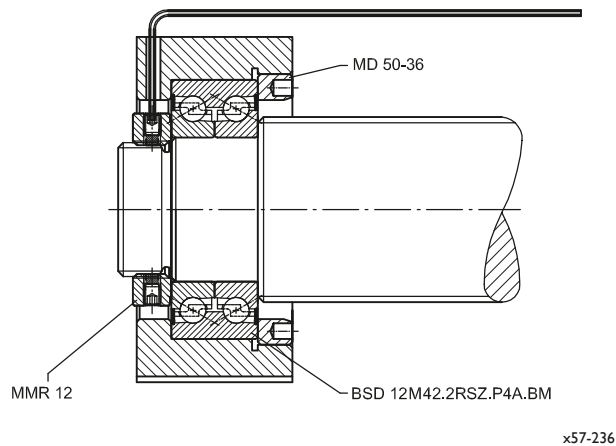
Bearings for a ball screw (BS) with components from the IBC modular system
